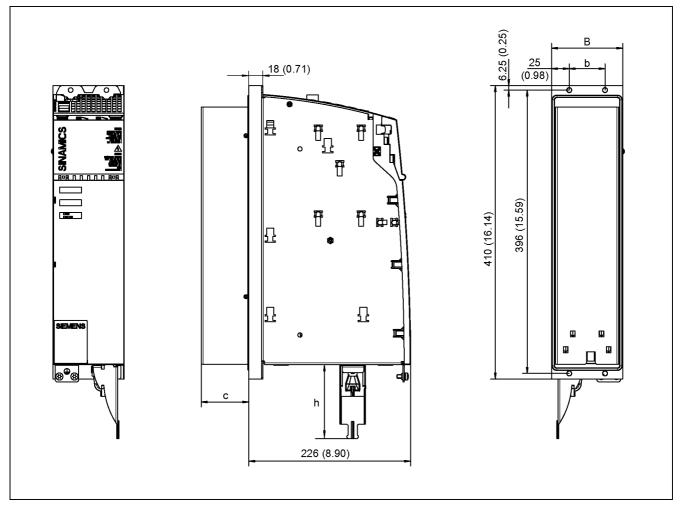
Dimension drawing of motor module with external air cooling (3 A to 30 A)
